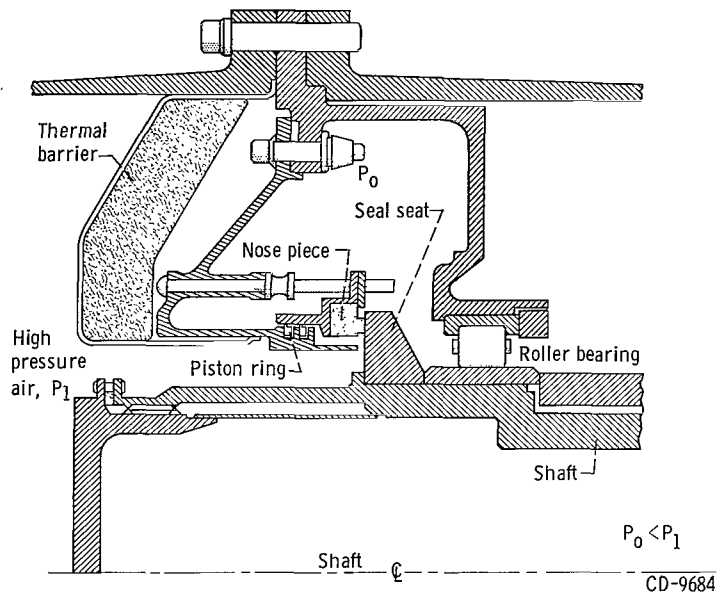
Bearing and seal assembly in simulated open engine sump used to evaluate face contact and hydrostatic seals.
